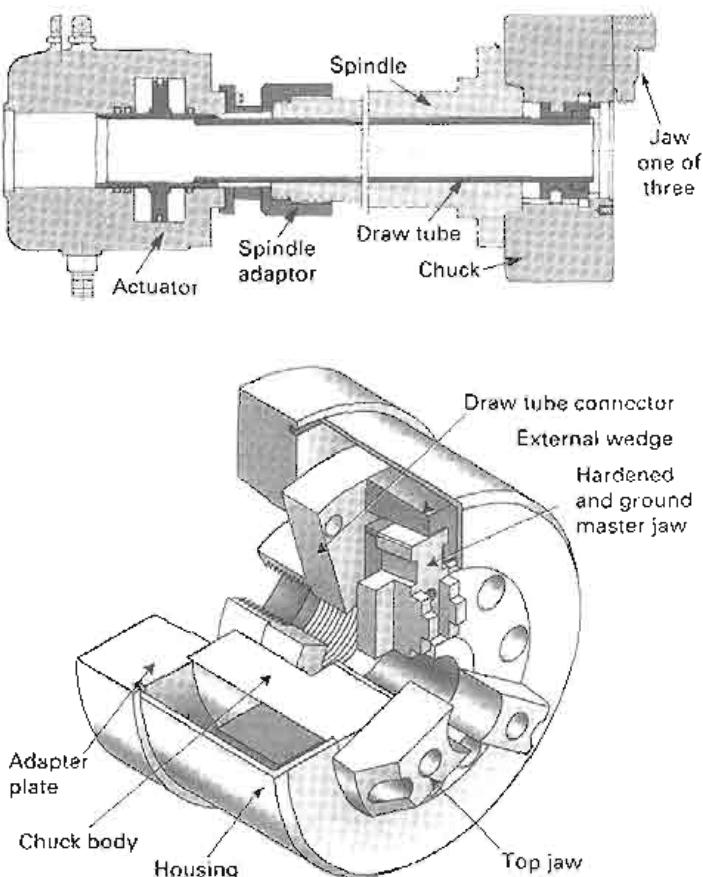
Hydraulically actuated through-hole three-jaw power chuck shown in section view to left and in the spindle of the lathe above connected to the actuator.
